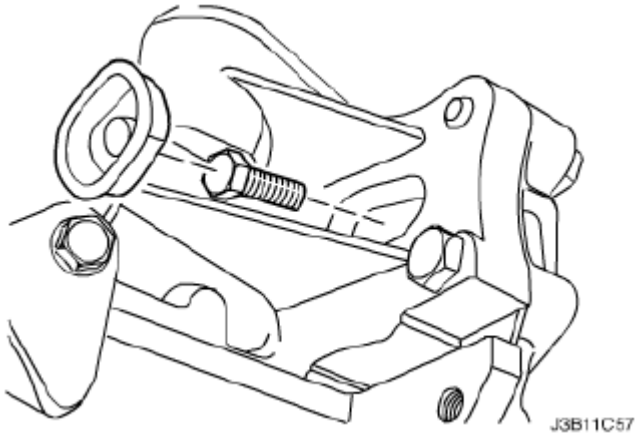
Removing/Installing Transaxle Torque Converter Bolt Through Service Hole
